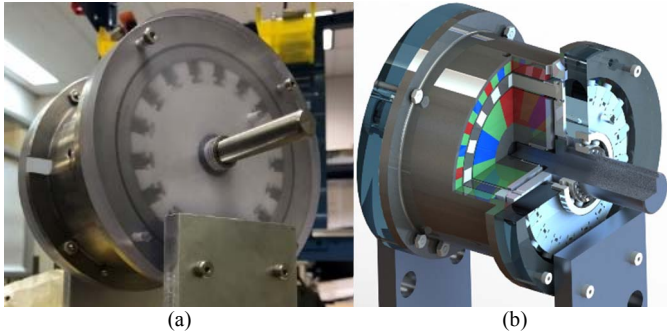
(a) Fully assembled prototype photo (b) Section view of the built prototype CAD image.
